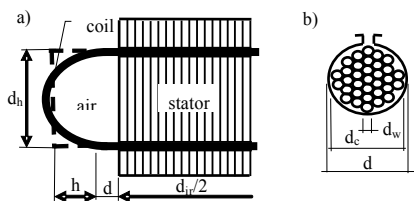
The simplified scheme of the motor winding coil: a - basic dimensions of coil, b - cross-section
